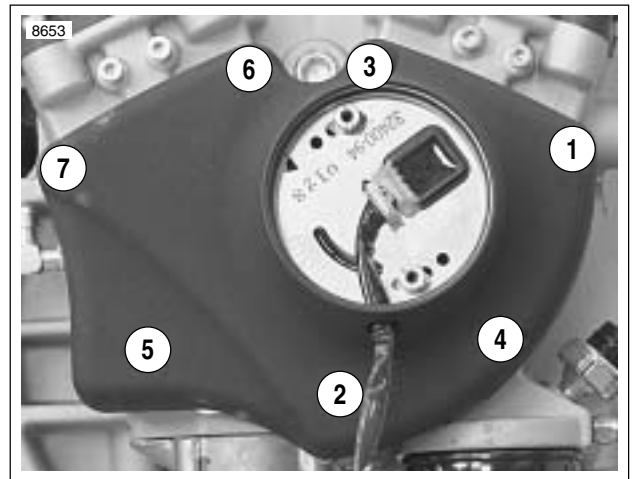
Gearcase Cover Mounting Screw Torque Sequence
